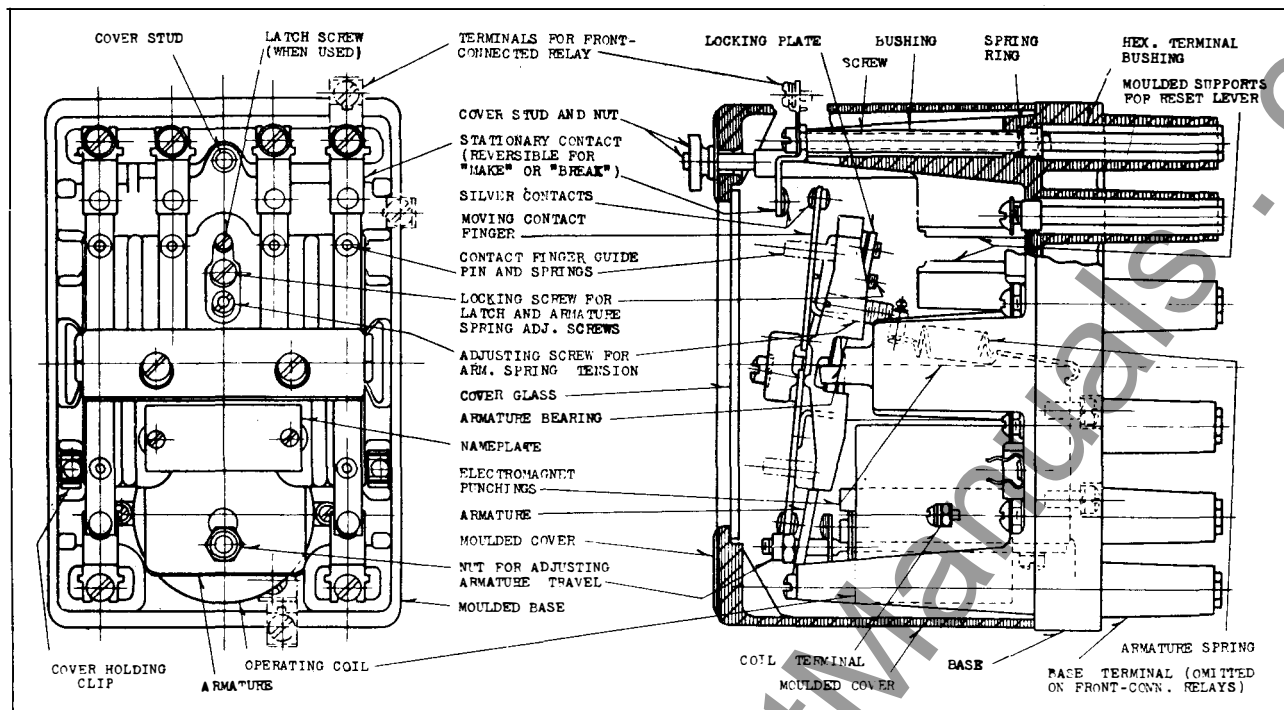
Front View (Cover Omitted) and Side View of the Type MG-6 Relay in the Molded Case, Without Latch or Reset.
